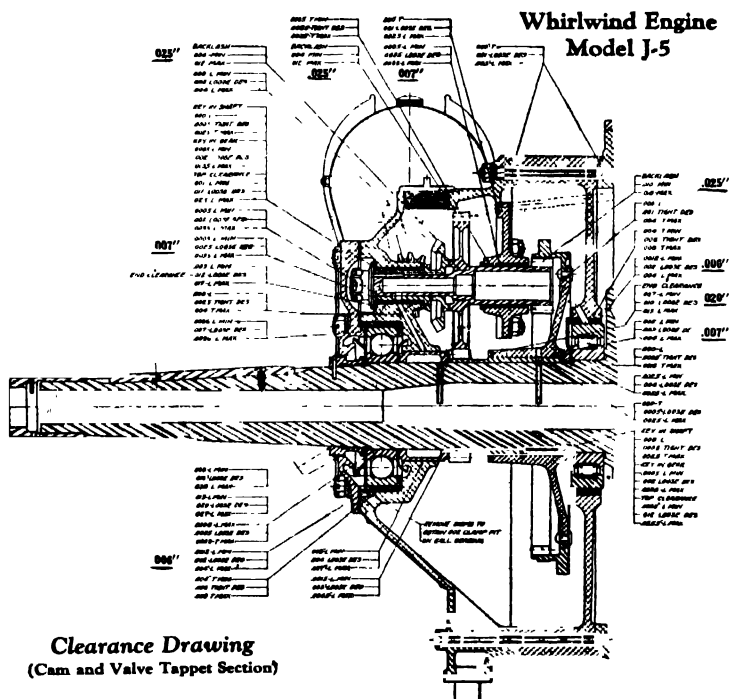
Clearance Drawing of Cam and Valve Tappet Lower Section of Model J5 Engine.
